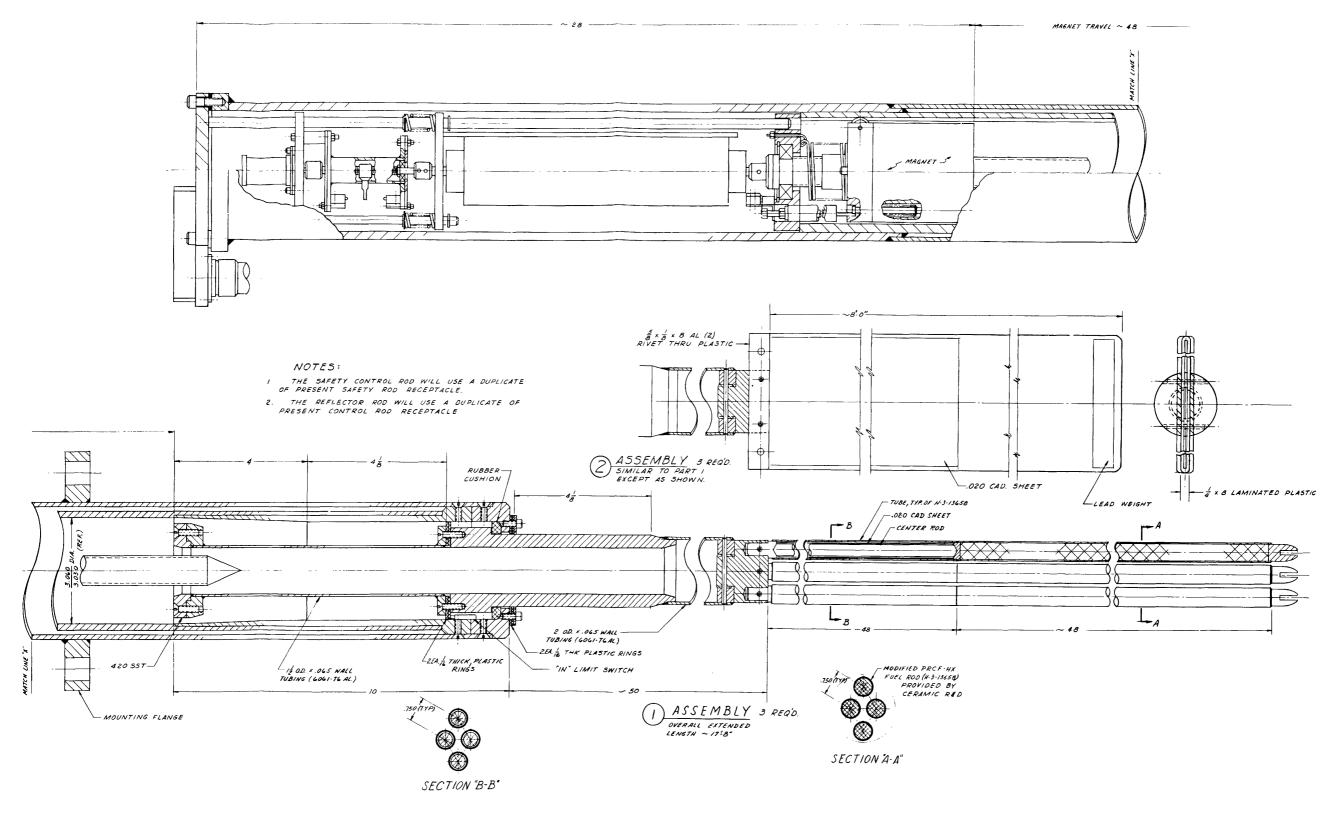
4 Control Rod and Reflector Safety Sheet Assembly
